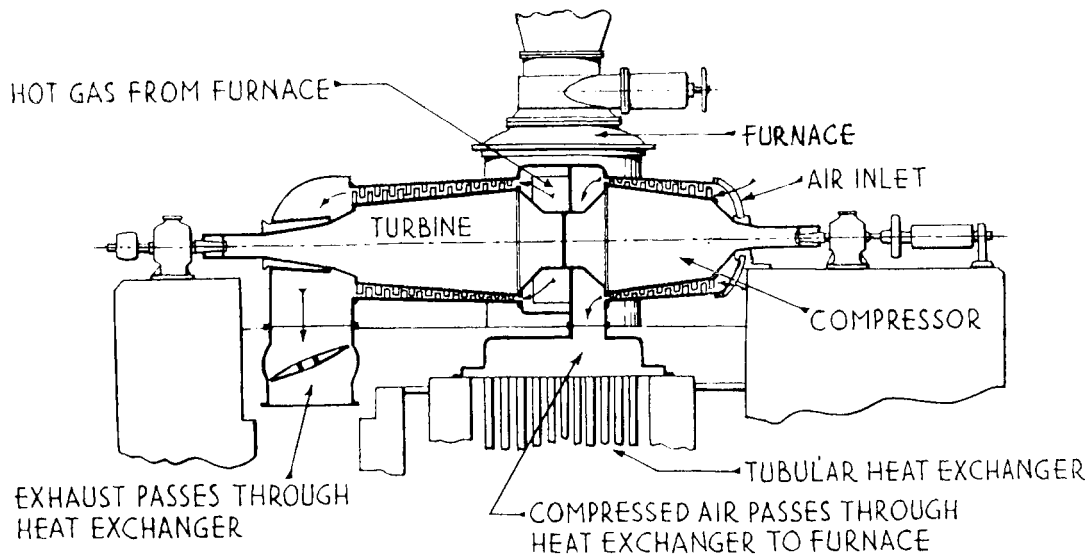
STOLZE'S TURBINE (1872-1904)
